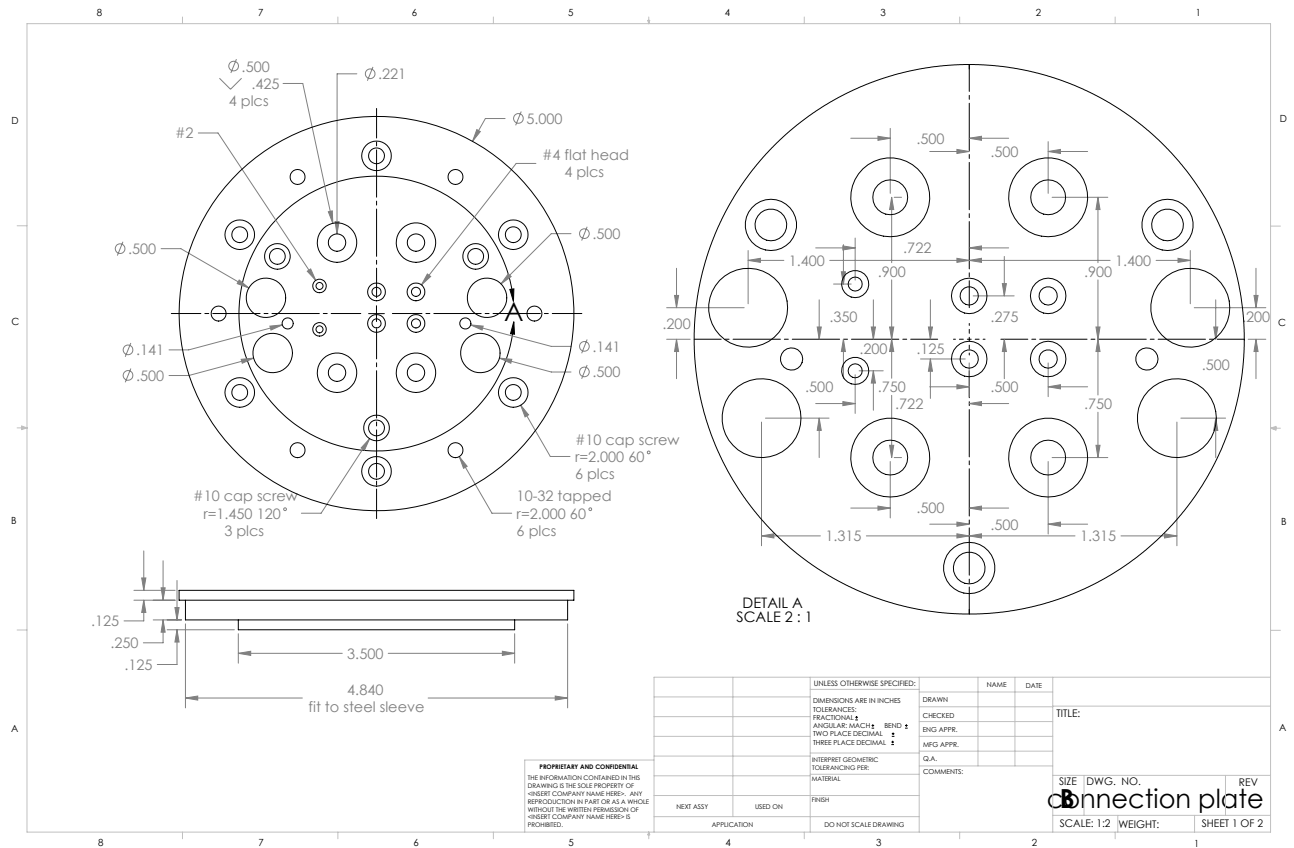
The drawing of the copper connection plate used to connect RF probe base. Note four 0.5 in. through holes built for placing the wave-guides. Dimensions are mixed in inches.
